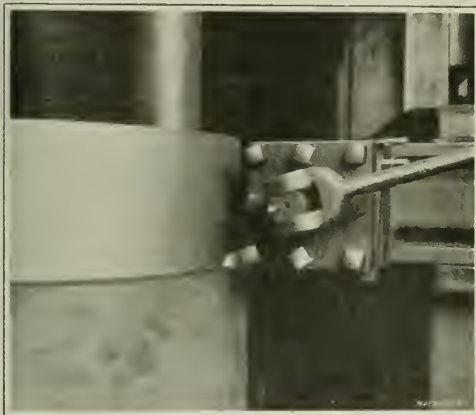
Close-up View of the Second Operation in machining the Piston-ring Casting illustrated diagrammatically in Fig. 4
